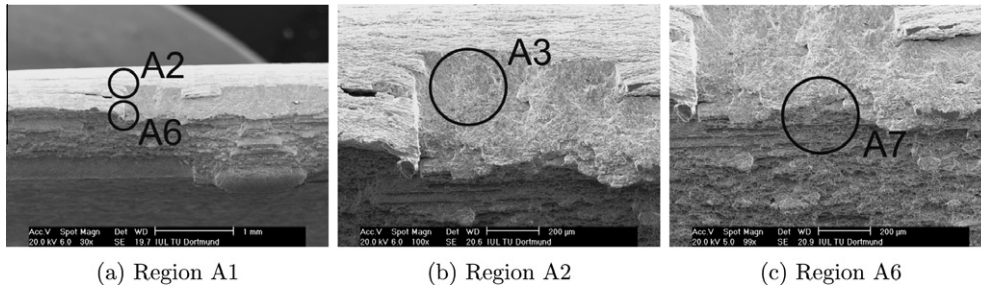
SEM fractographs from fracture surfaces, Part I.
